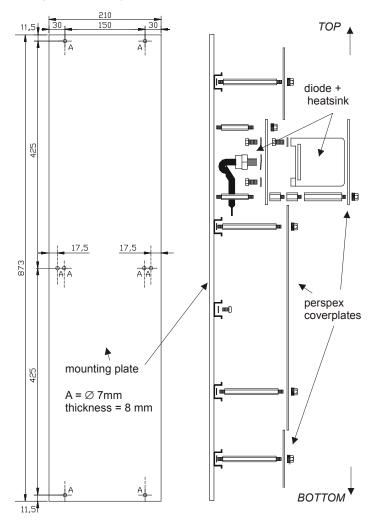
Mounting plan and measurements of the FS-FEEDER-24R
